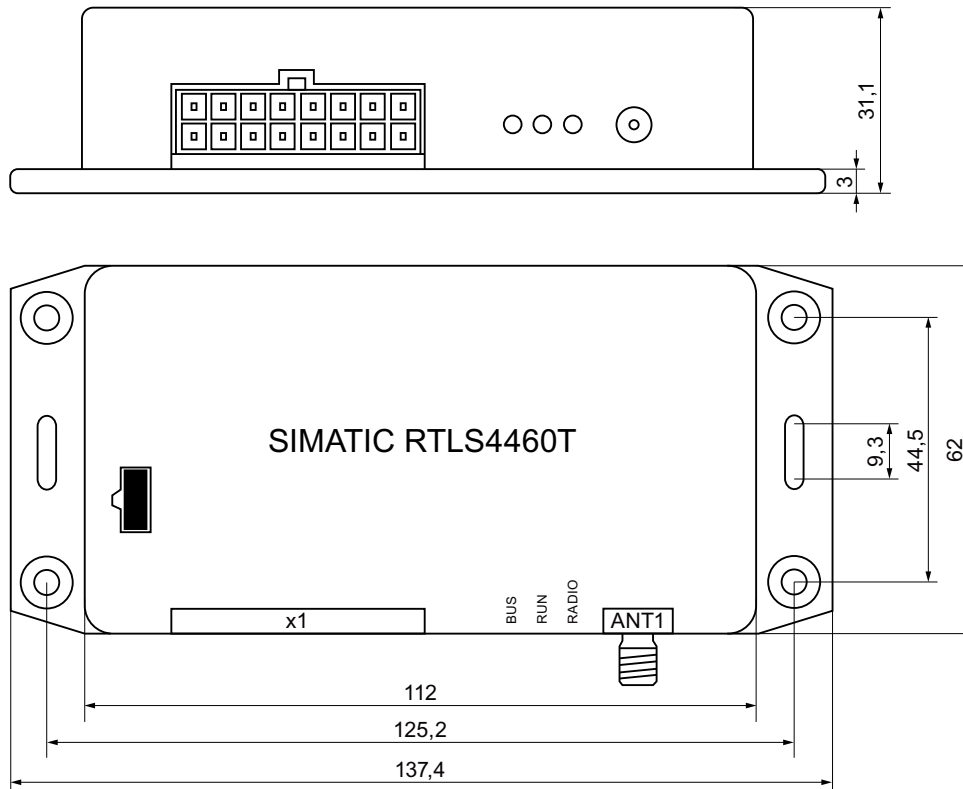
Dimension drawing SIMATIC RTLS4460T - All dimensions specified in millimeters
